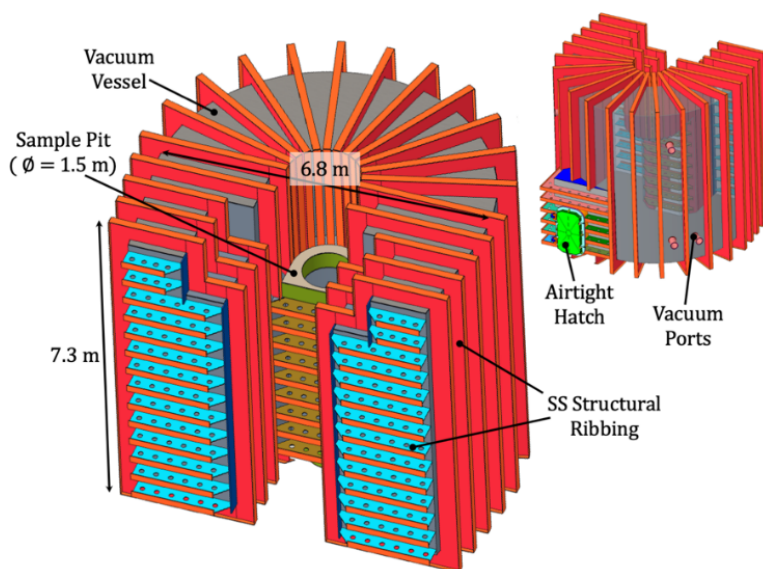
Layout of the CHESS Detector Vacuum Vessel, with its main components and dimensions.
